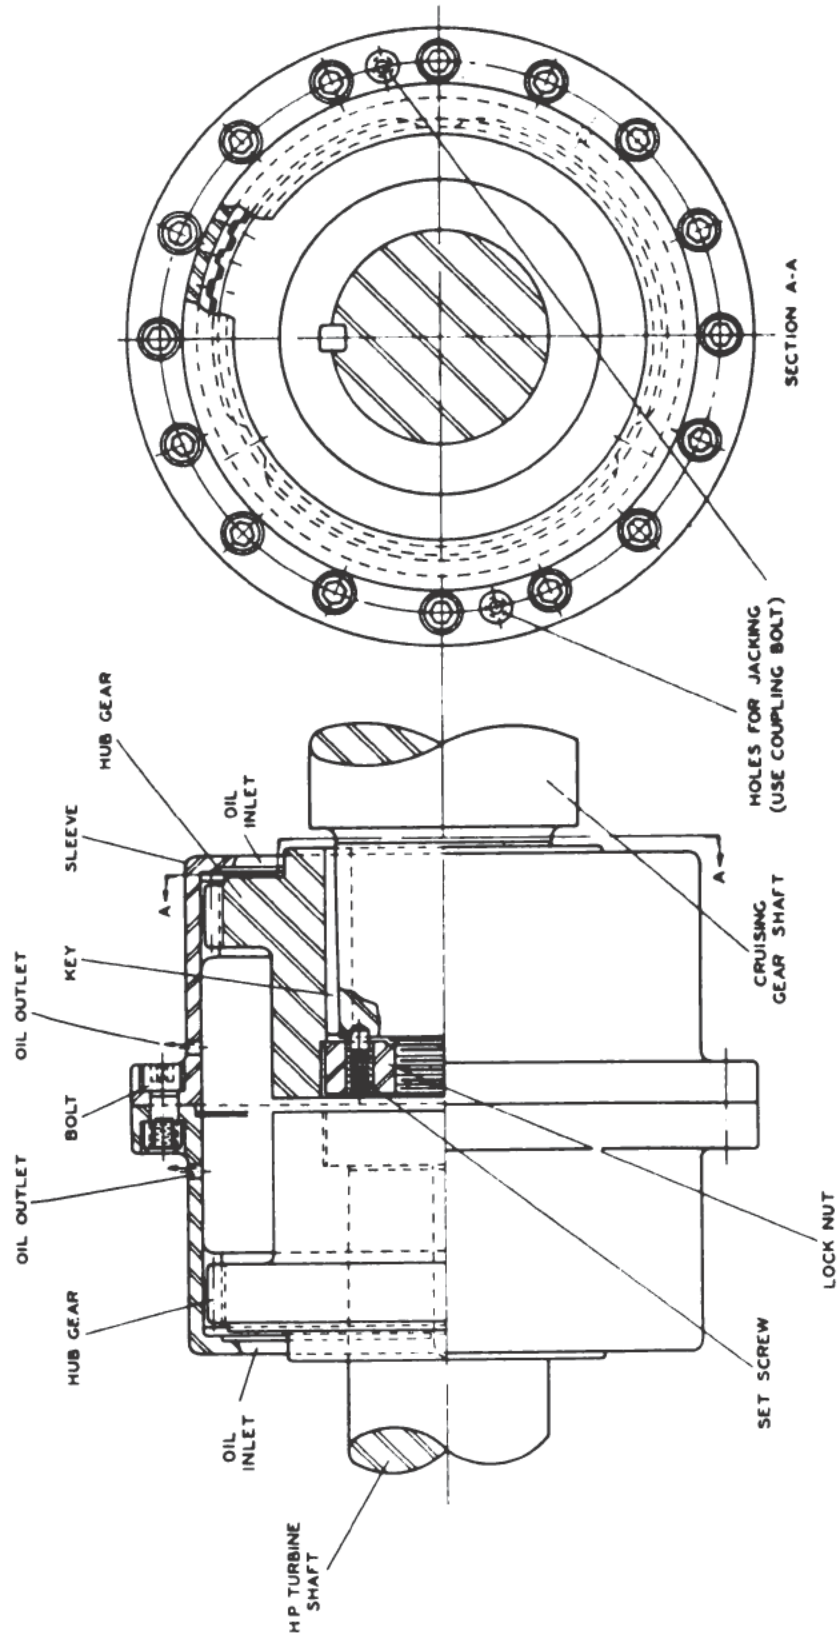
Flexible coupling between the cruising gear and the high-pressure turbine.
